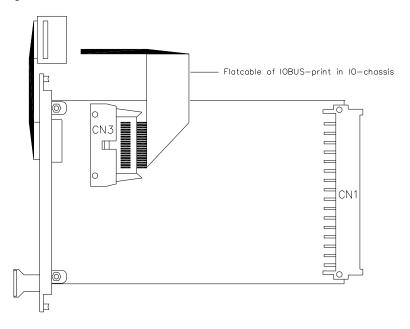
Side view of the IO-0001 module with a flatcable from a non-redundant IO chassis
